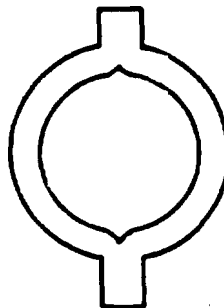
Ring Shaped Test Member Used With Strain Gage Wheatstone Bridge
